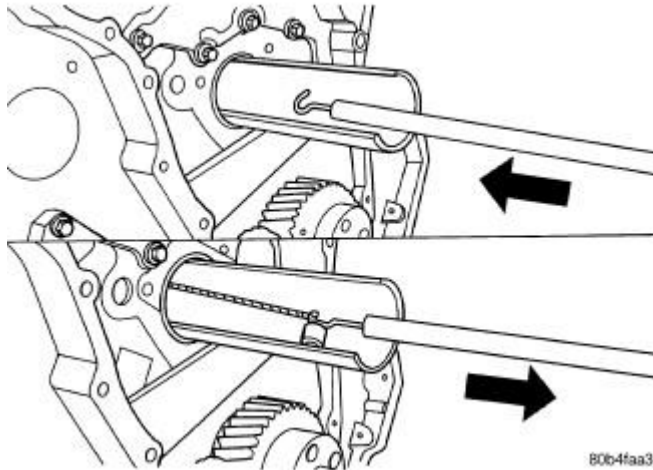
Retrieve Tappet Installation Tool through Cam Bore
